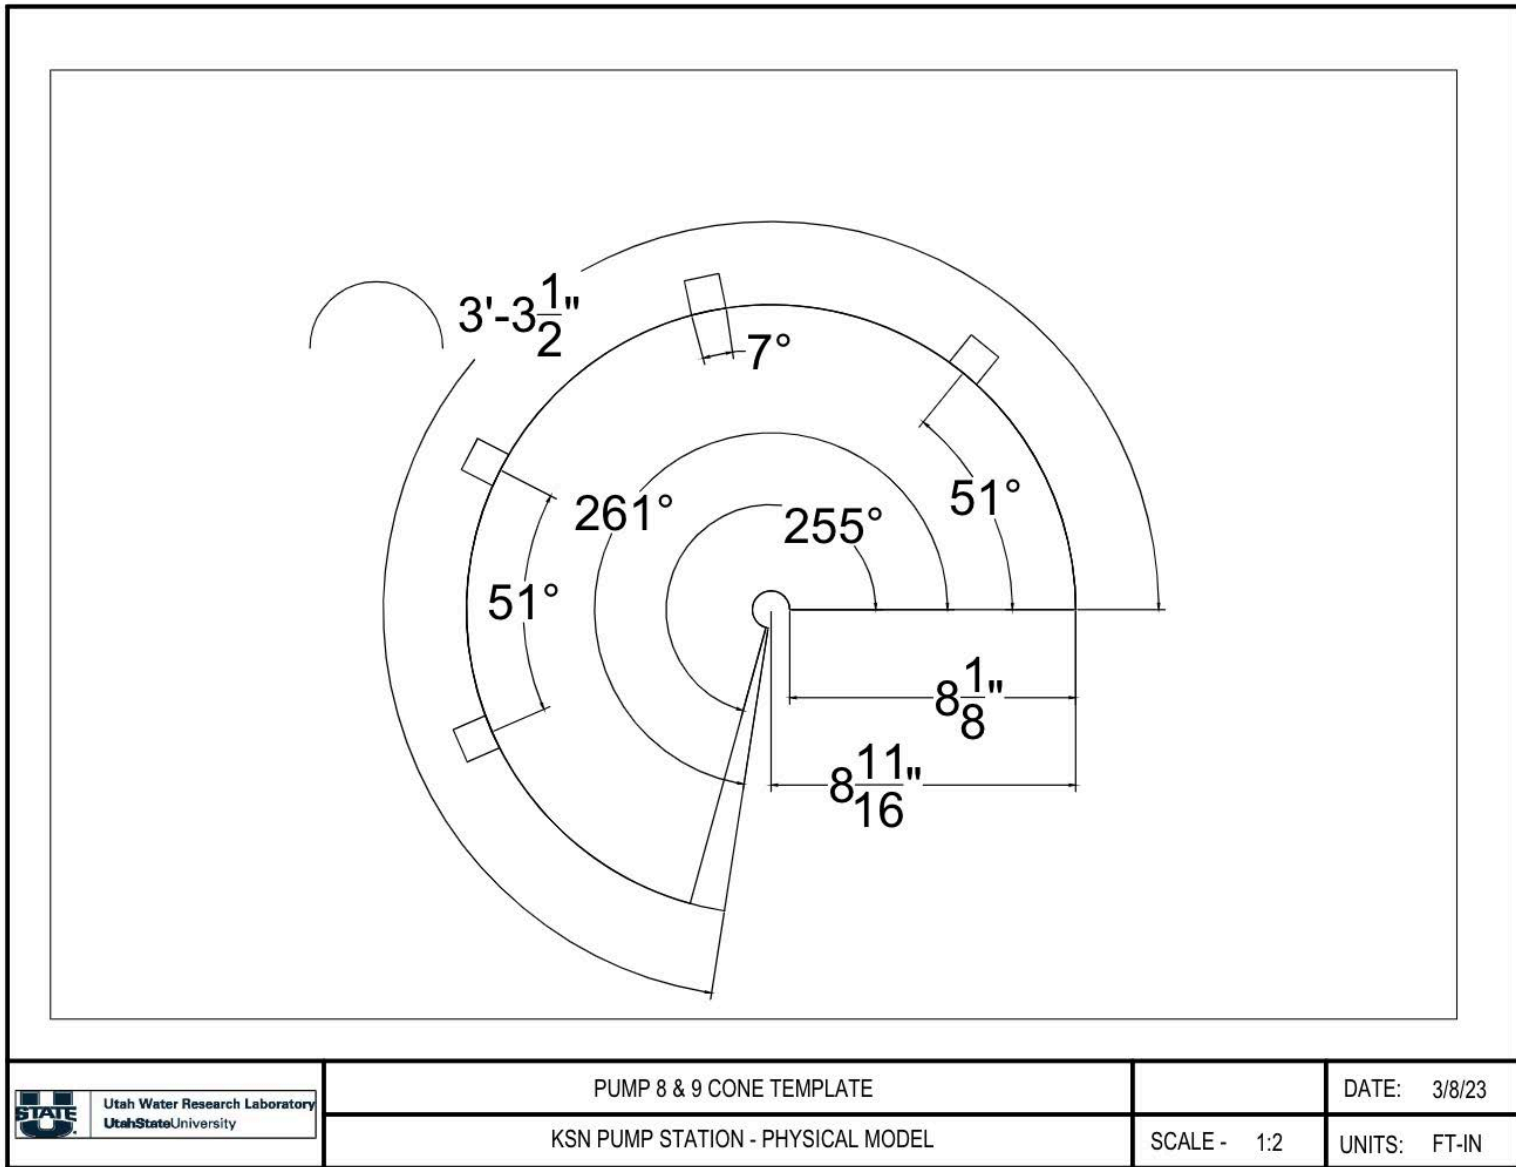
Pump bell floor cone template for pumps 8 and 9
